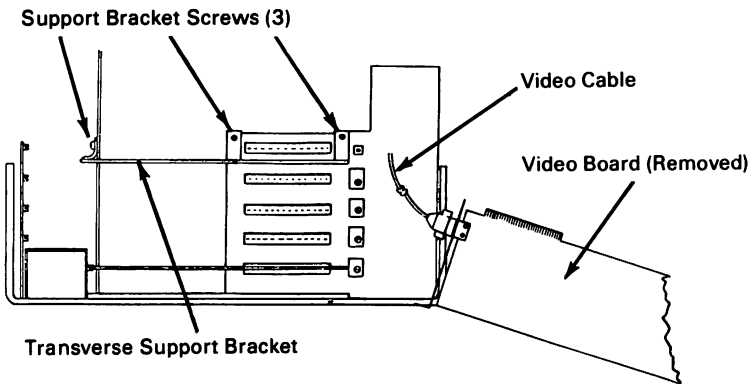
Rear View of PC Unit. Removal of Video Board & Removal of Transverse Support Bracket
